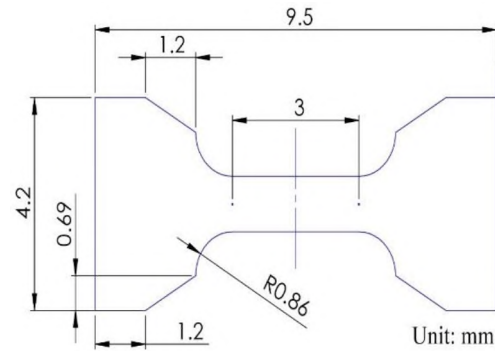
The dimensions of the tensile bar. The measurement unit is mm.
